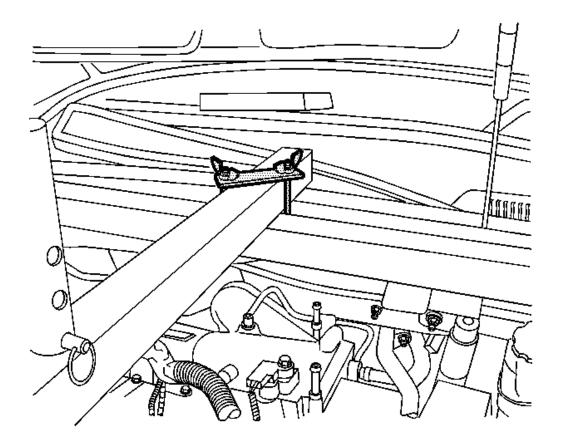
Identifying Special Tools - J 28467-1A Courtesy of GENERAL MOTORS CORP.
